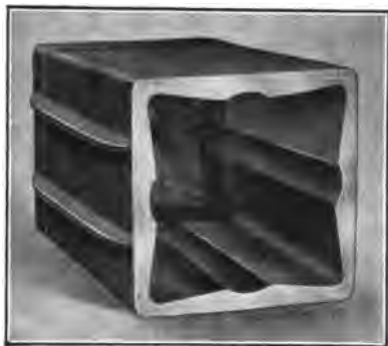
Large Steel Casting Broached as Illustrated in Figs. 20 and 21
